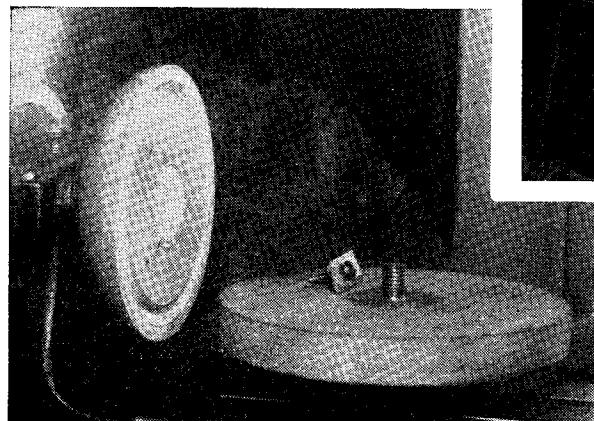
is a 4 in. G.M. mitre wheel of 56 teeth, which had lost its pair. To replace the latter and avoid work of making pattern, turning, boring and bevel-tooth cutting, the pair was cast from it, stopping off the double-forked driver. After dressing the teeth, which tended to bind, due to shrinkage, on their sides only, the problem of chucking it to the bore and turning the solid boss was presented. This is how it was done. Fig. 8 is almost explanatory, Fig. 9 shows the wood chuck mounted on lathe in course of preparation to take it, and Fig. 10 shows it clamped to setting as after the boss was turned and bored. The diameter (*A*) across
